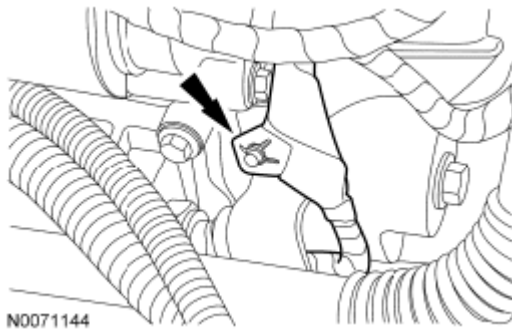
Locating Starter Wire Harness Retainer Of Starter Motor Stud Bolt
